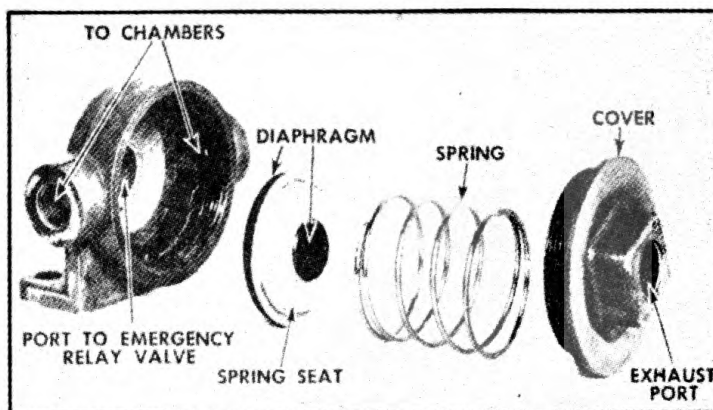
QUICK RELEASE VALVE—DISASSEMBLED
